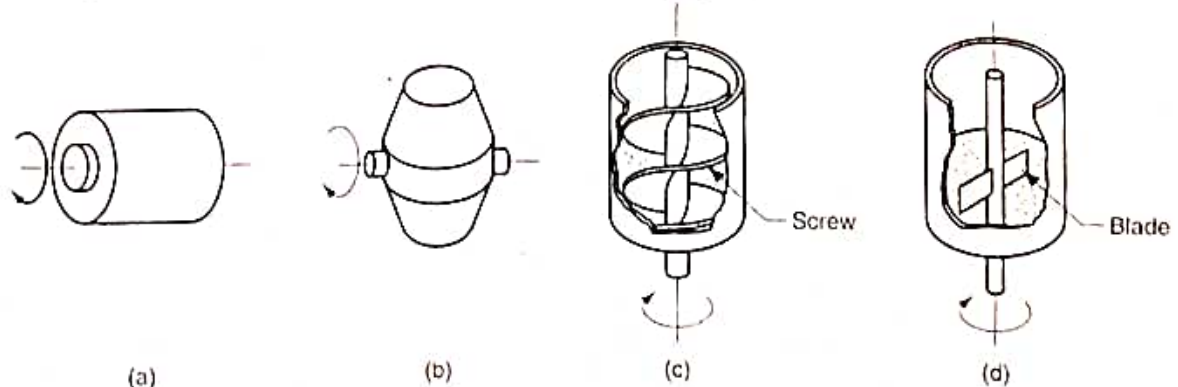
Several blending and mixing devices: (a) rotating drum, (b) rotating double cone, (c) screw mixer, and (d) blade mixer.
